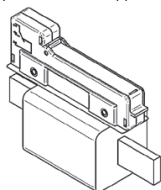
, Plug-in Type Fuse Alarm Impactor installation method
